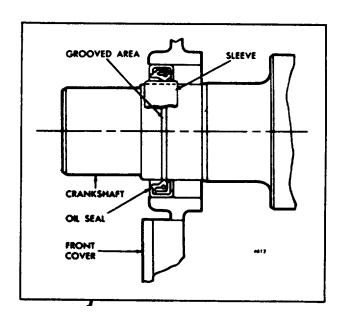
Use of Front Oil Seal Sleeve on Grooved Crankshaft.
